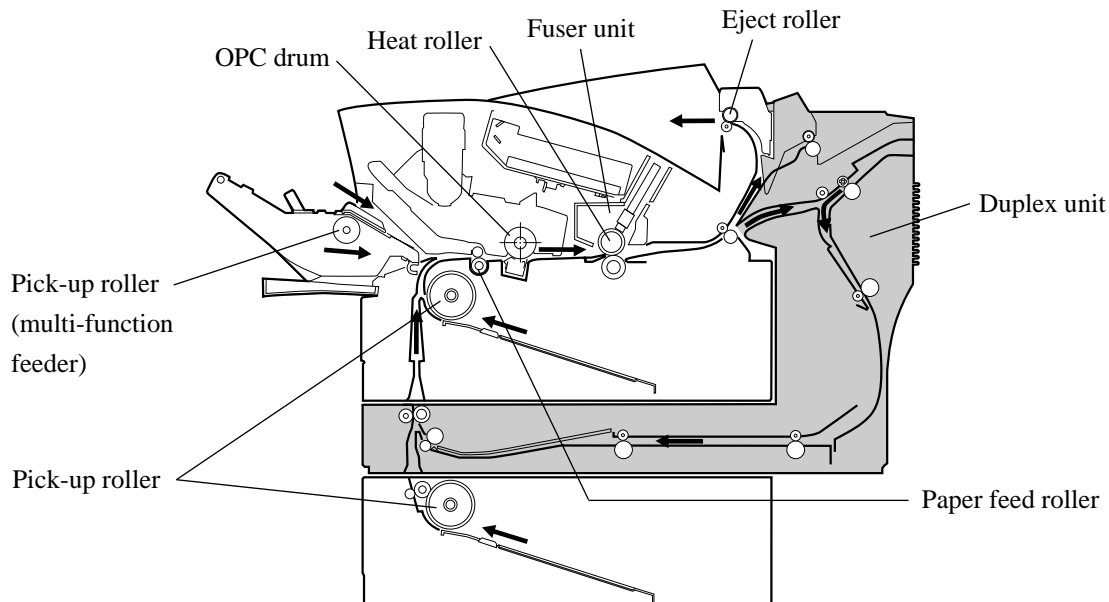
Picking, Printing, Fusing, and Ejecting Paper
